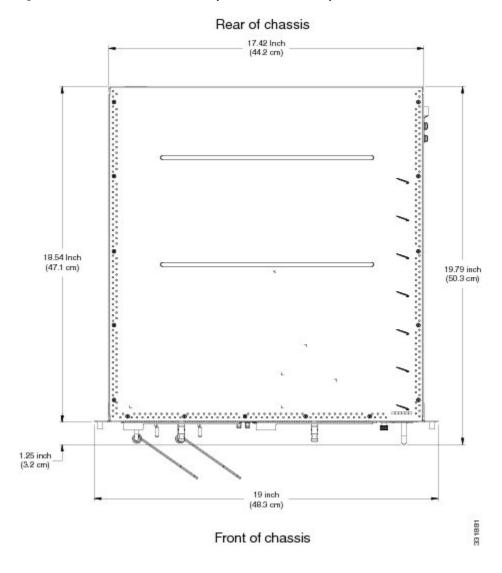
Cisco ASR 9001 Router Chassis Footprint and Dimensions—Top View
